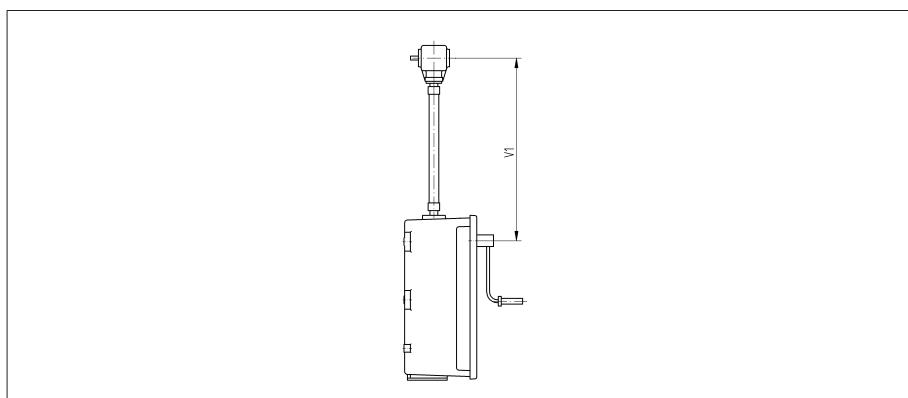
Drive shaft without cardan shaft, without insulator (= normal model)
